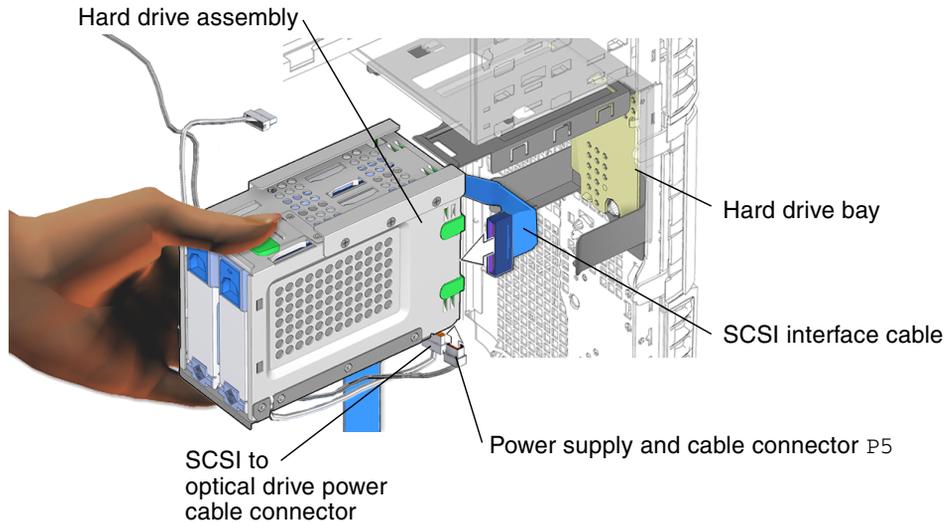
Installing and Verifying Installation of Hard Drive Assembly Cables
